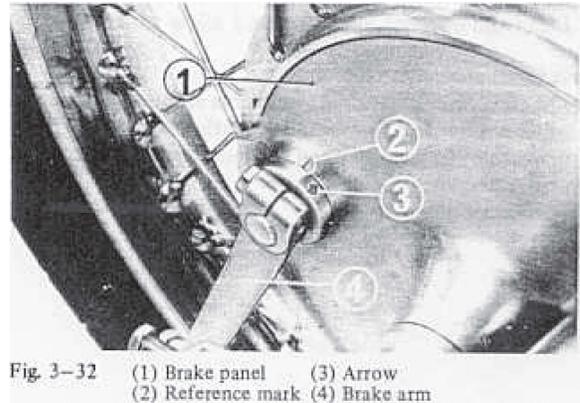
(1) Brake panel (2) Reference mark (3) Arrow (4) Brake arm
